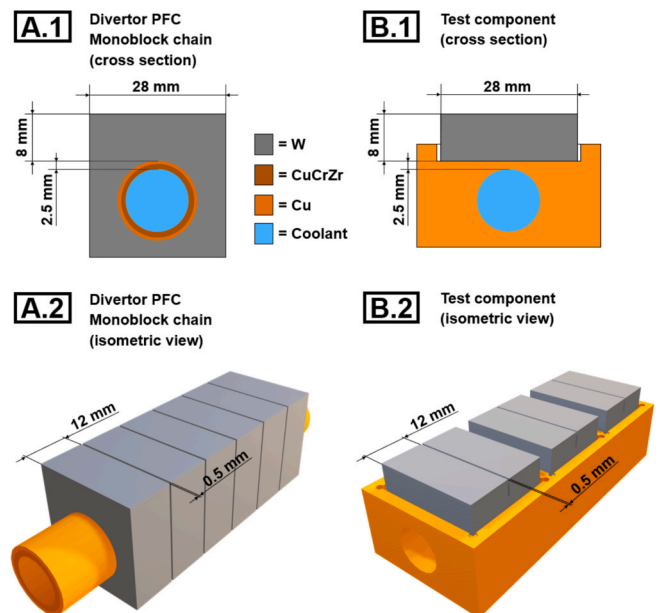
The divertor monoblock chain design is schematically illustrated in the cross section A.1) and isometric view A.2). The test component design for the HHF experiments is illustrated in the cross section B.1) and isometric view B.2). For both designs, the W surface area for thermal loads acting from above is $28 \times 12 \text{ mm}^2$. In both variants, the thermal energy arriving from the top surface has to be conducted in the center of the component through 8 mm W and 2.5 mm Cu/CuCrZr to reach the coolant.
